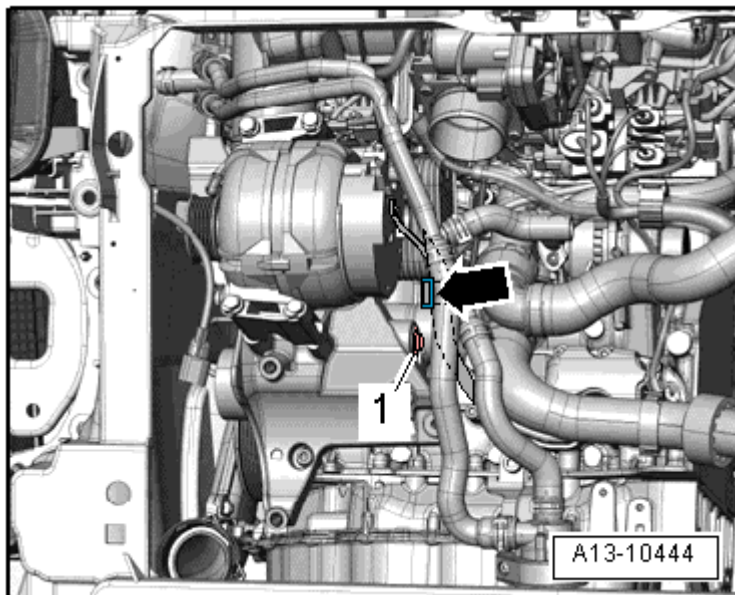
Identifying Ribbed Belt Tensioner Bolt And Locating Electrical Wiring Harness
